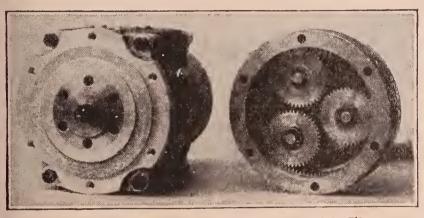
Reducing Gearing Attached to Ward-Leonard Starting Motor
